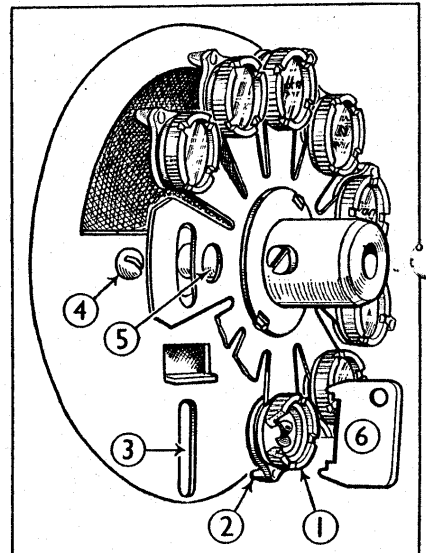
Perspective sketch of the Cossor Teledial with the moulded dial removed and two of the control plate tongues cut away.
